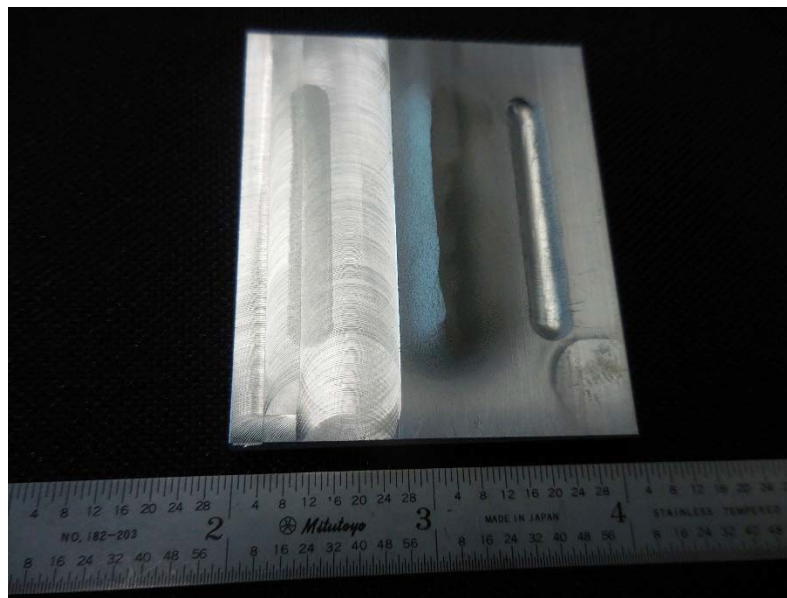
Magnified view of one of the small panels with milled surface on the left
